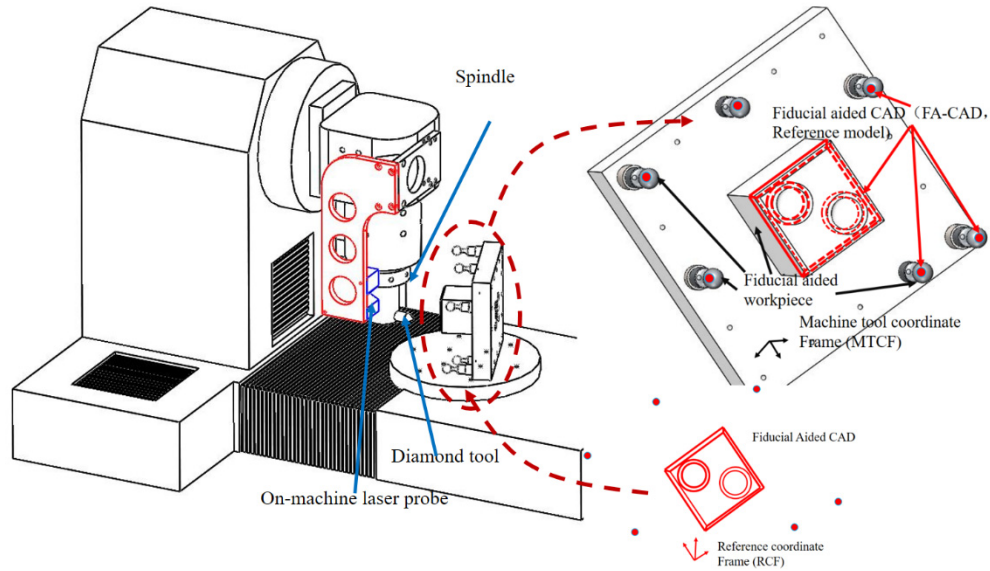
Positioning the remounted workpiece by using on-machine laser probe measuring fiducials (references).
